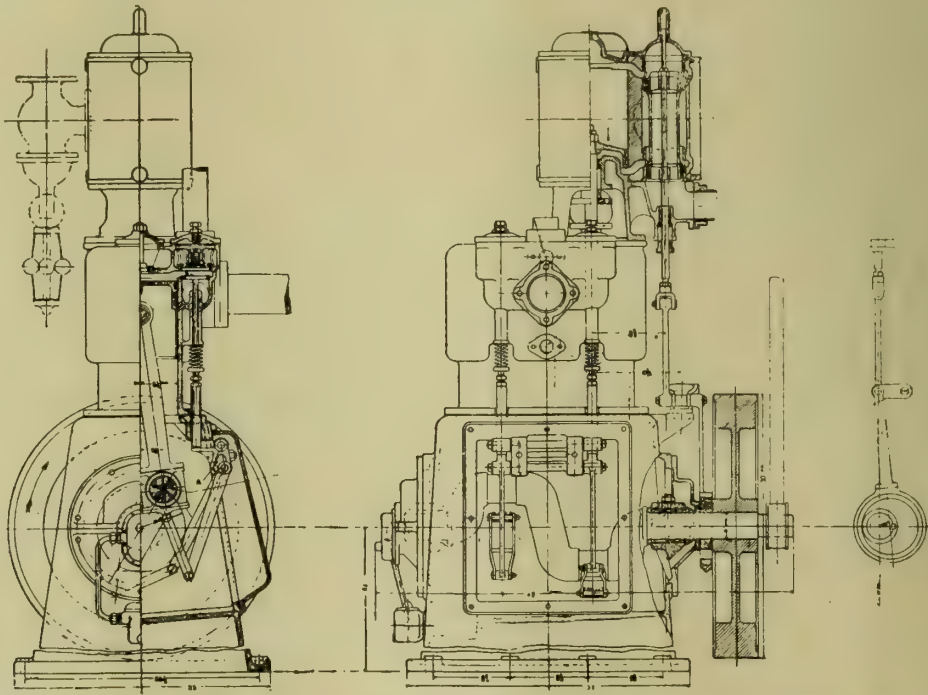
SECTION OF TWO CYLINDER STEAM-DRIVEN AIR COMPRESSOR. MESSRS. BROOM & WADE, LTD., HIGH WYCOMBE.
